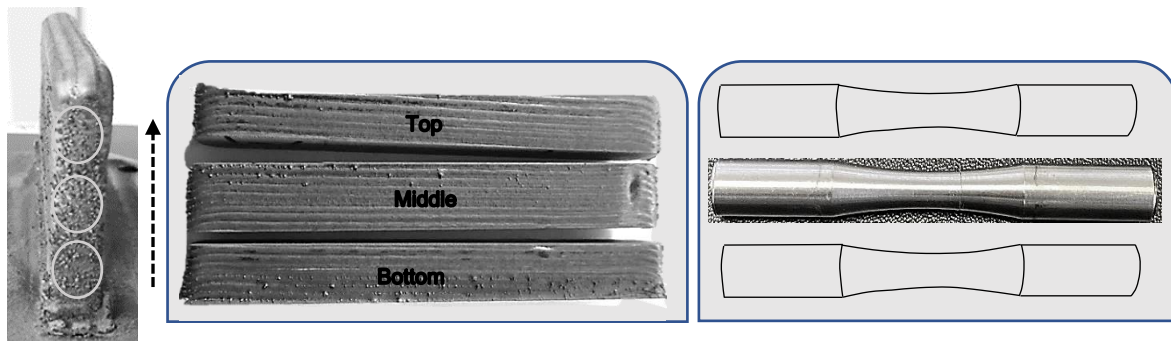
DED coupon showing the positions of the tensile and fatigue specimens.
